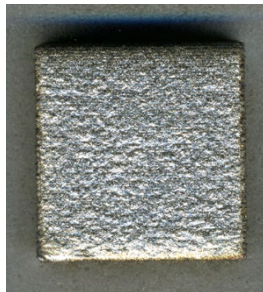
Radiused Raster Toolpath, Single Layer Deposition.
